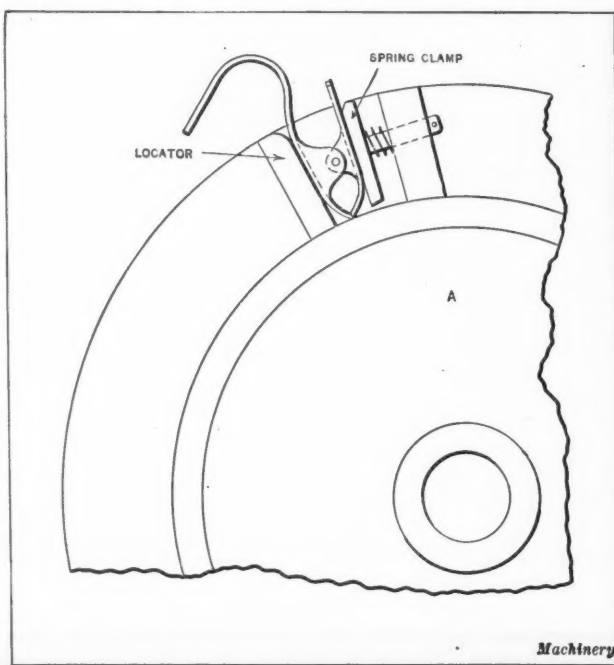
Method of holding Assembled Hooks on Riveting Machine
